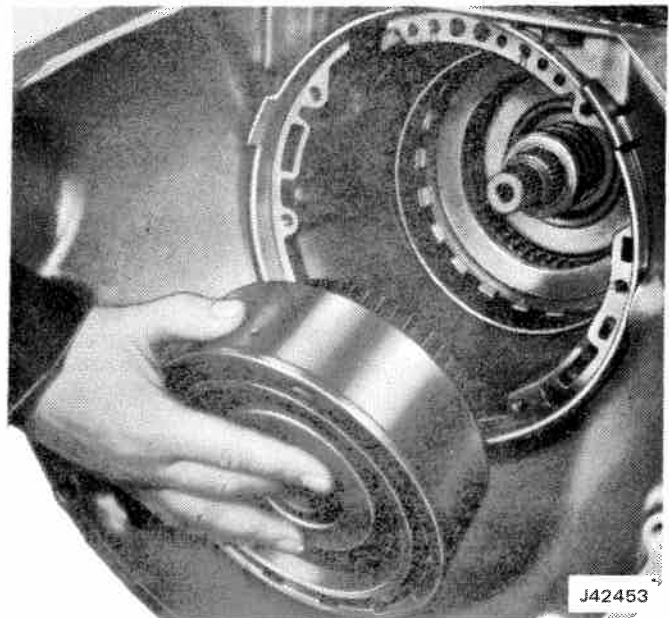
Removing-Installing Direct Clutch Assembly
